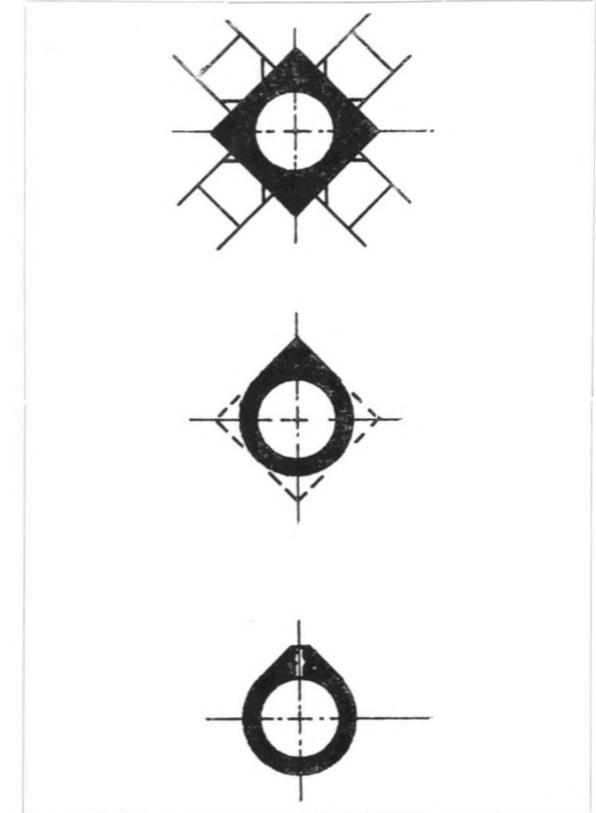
Sequence of operations for making eccentric strap. Drawn full size. From top to bottom :
